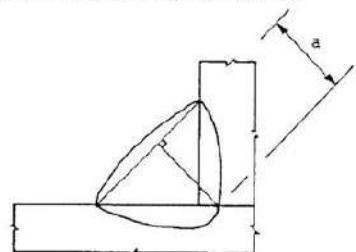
Throat thickness of a deep penetration fillet weld
